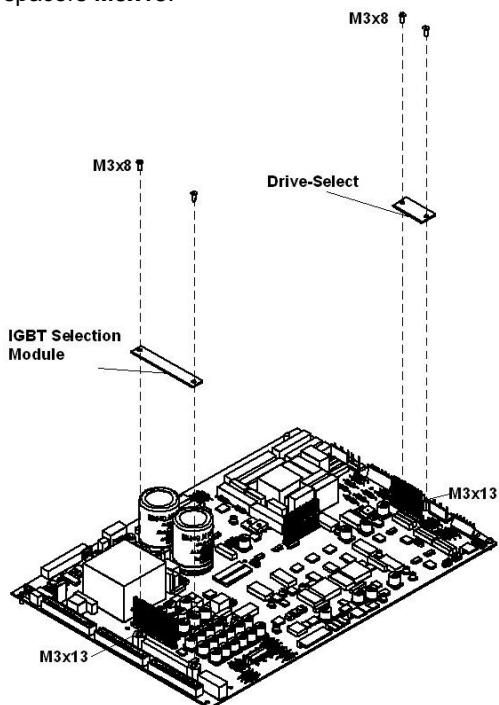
Disassembly of the Drive-select and the IGBT selection module
